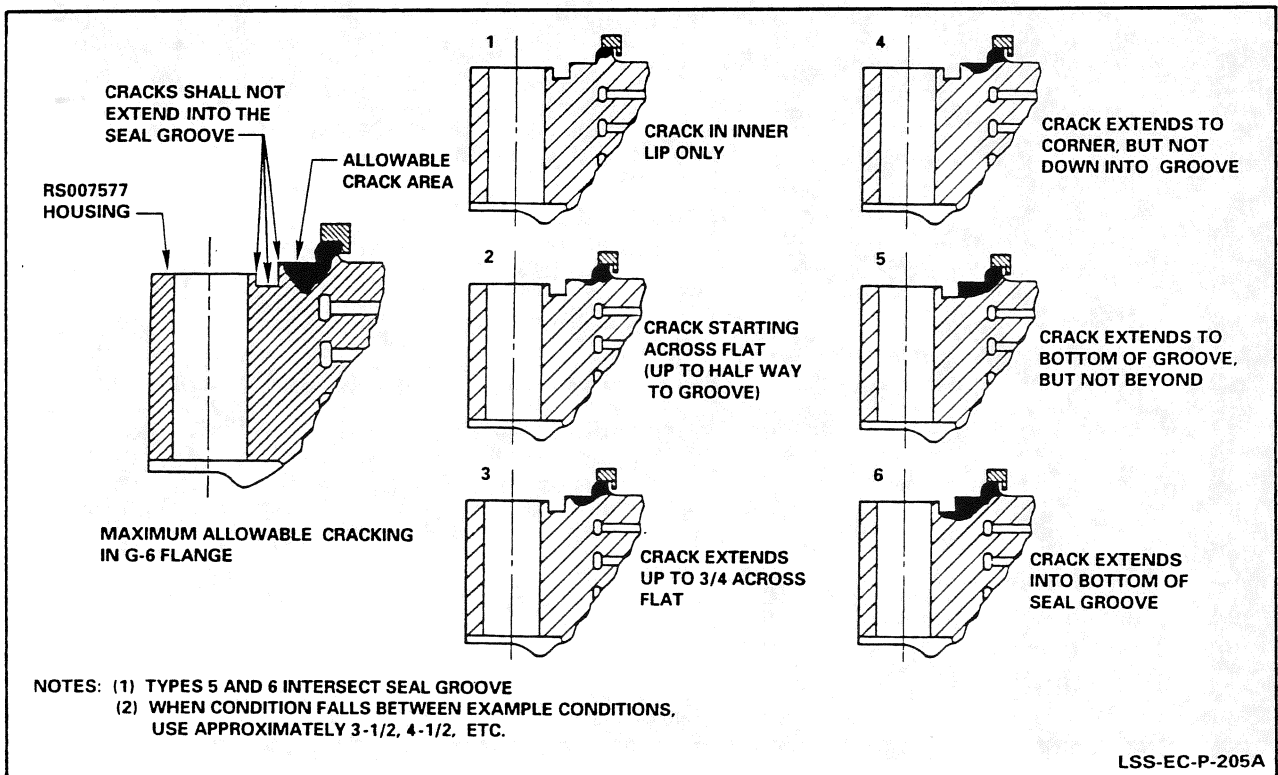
HPFTP Joint G6 Flange Crack Definitions
